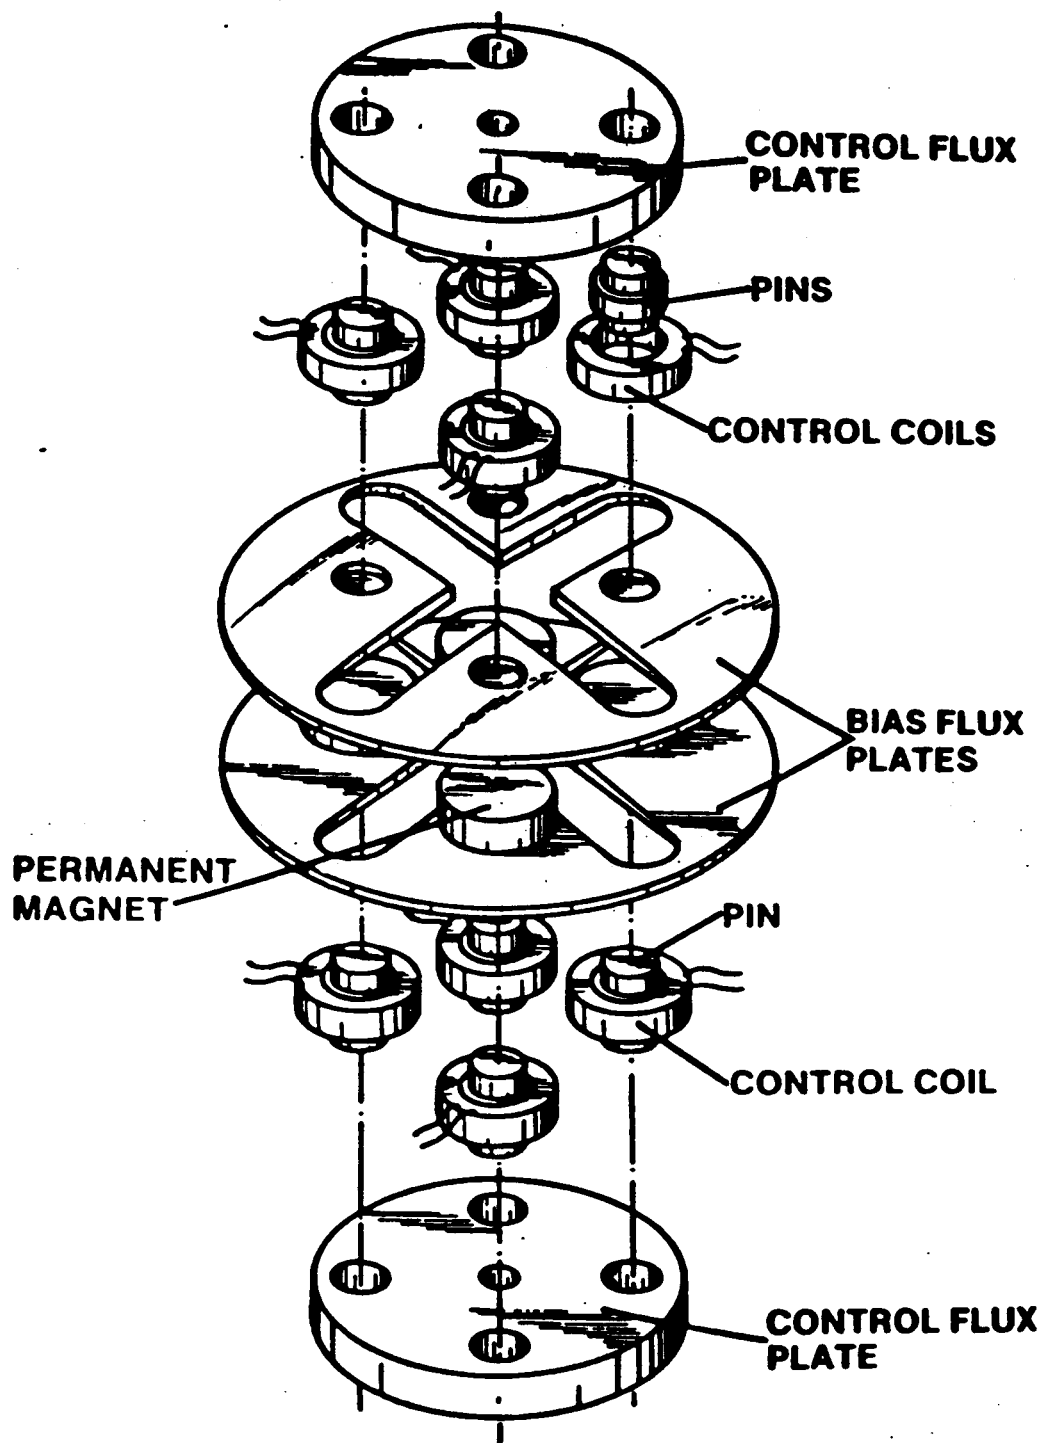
Exploded view of the Permanent Magnet + Electromagnet Pancake Magnetic Bearing assembly.
